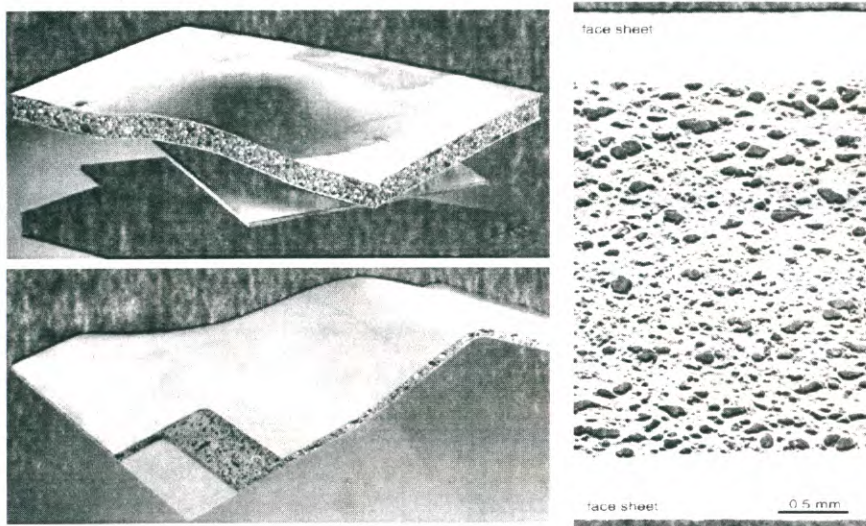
Sandwich structure made of porous material and cross section of element with variable porosity [1]
